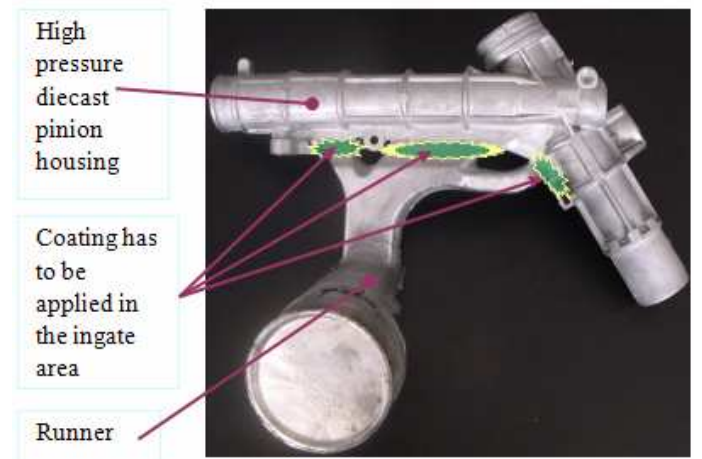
Coated areas in the case of a HPDC mould for a pinion housing
